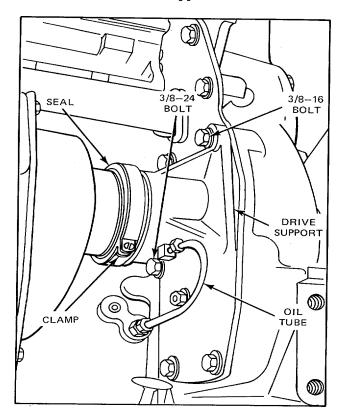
Blower Drive Support Mounting on 4-53 In-Line Engine
